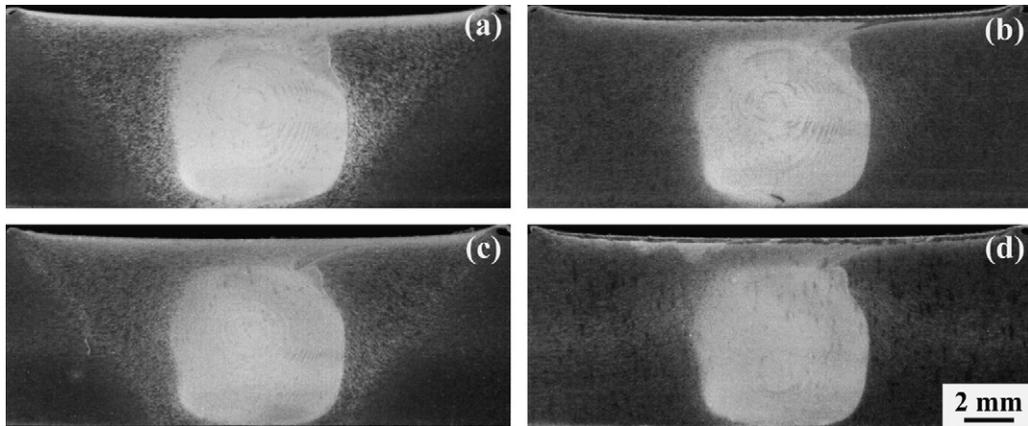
Cross-sectional macrographs of FSW 7075Al-T651: (a) as-welded butt weld, (b) PW-T6 butt weld, (c) as-welded stir-in-plate weld, and (d) PW-T6 stir-in-plate weld (the advancing side is on the right).
